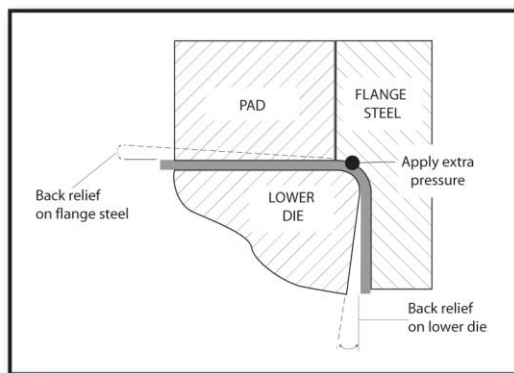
Over-bending is assisted when back relief is provided on the flange steel and lower die
